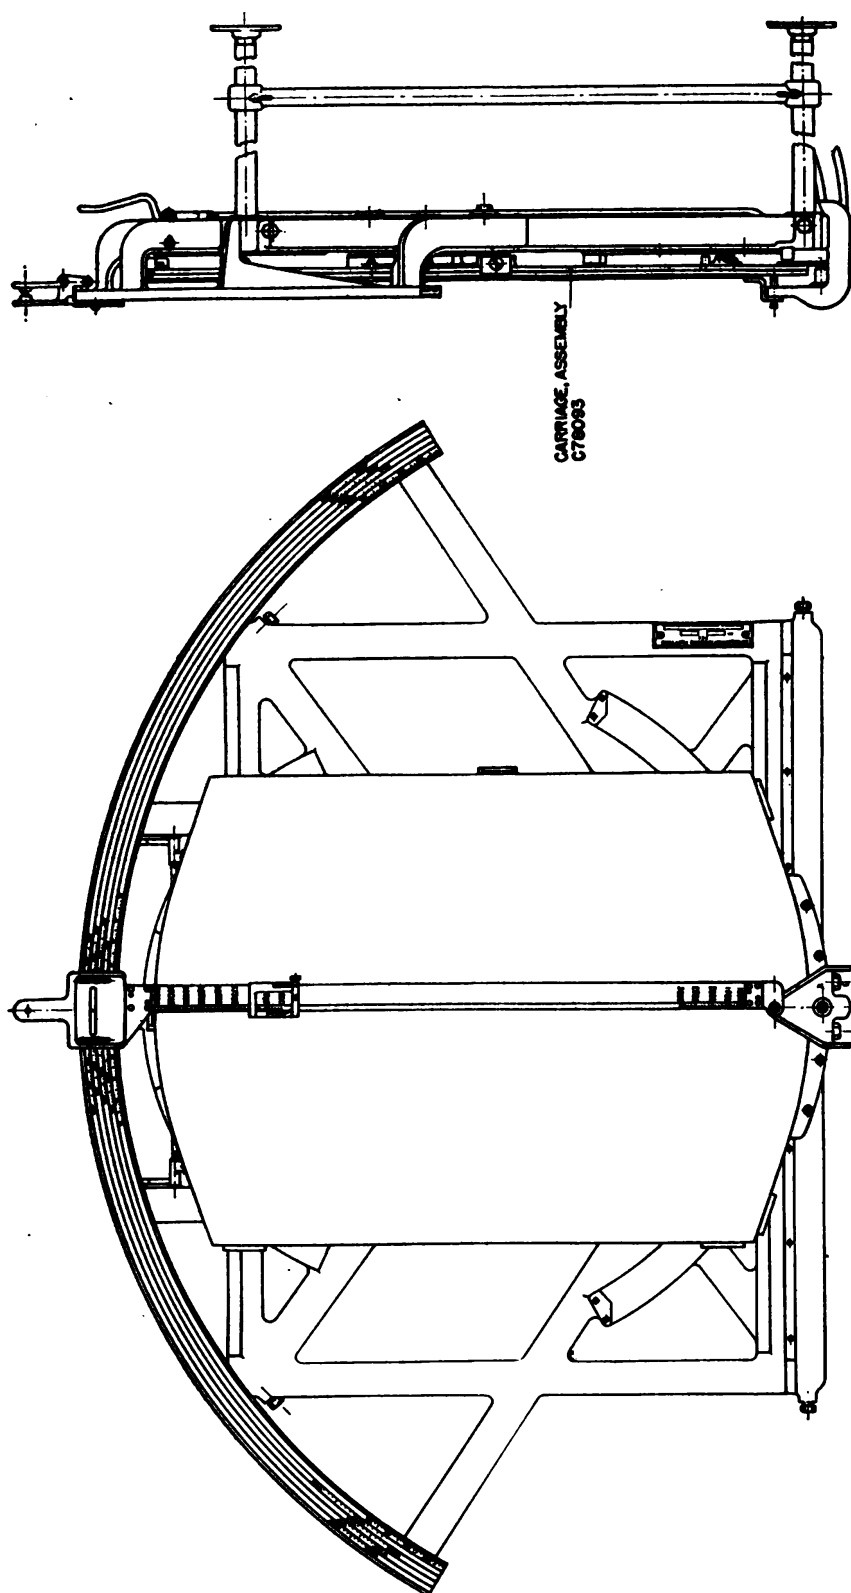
Sound ranging plotting board M1, assembled views.
